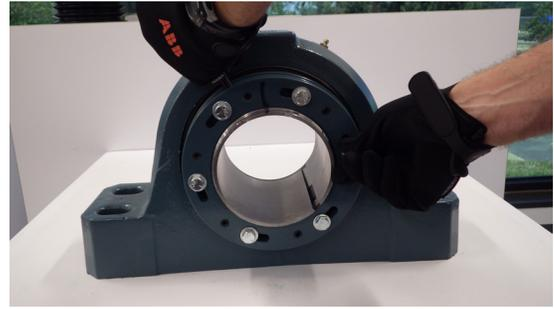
Holding external nut with rod and rotating internal nut C-Clockwise using hex head bolt
